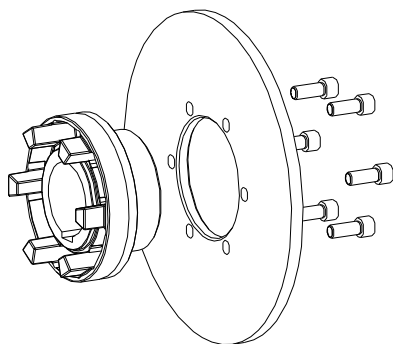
assembly of the Brake disk (types SBA and BTA)
